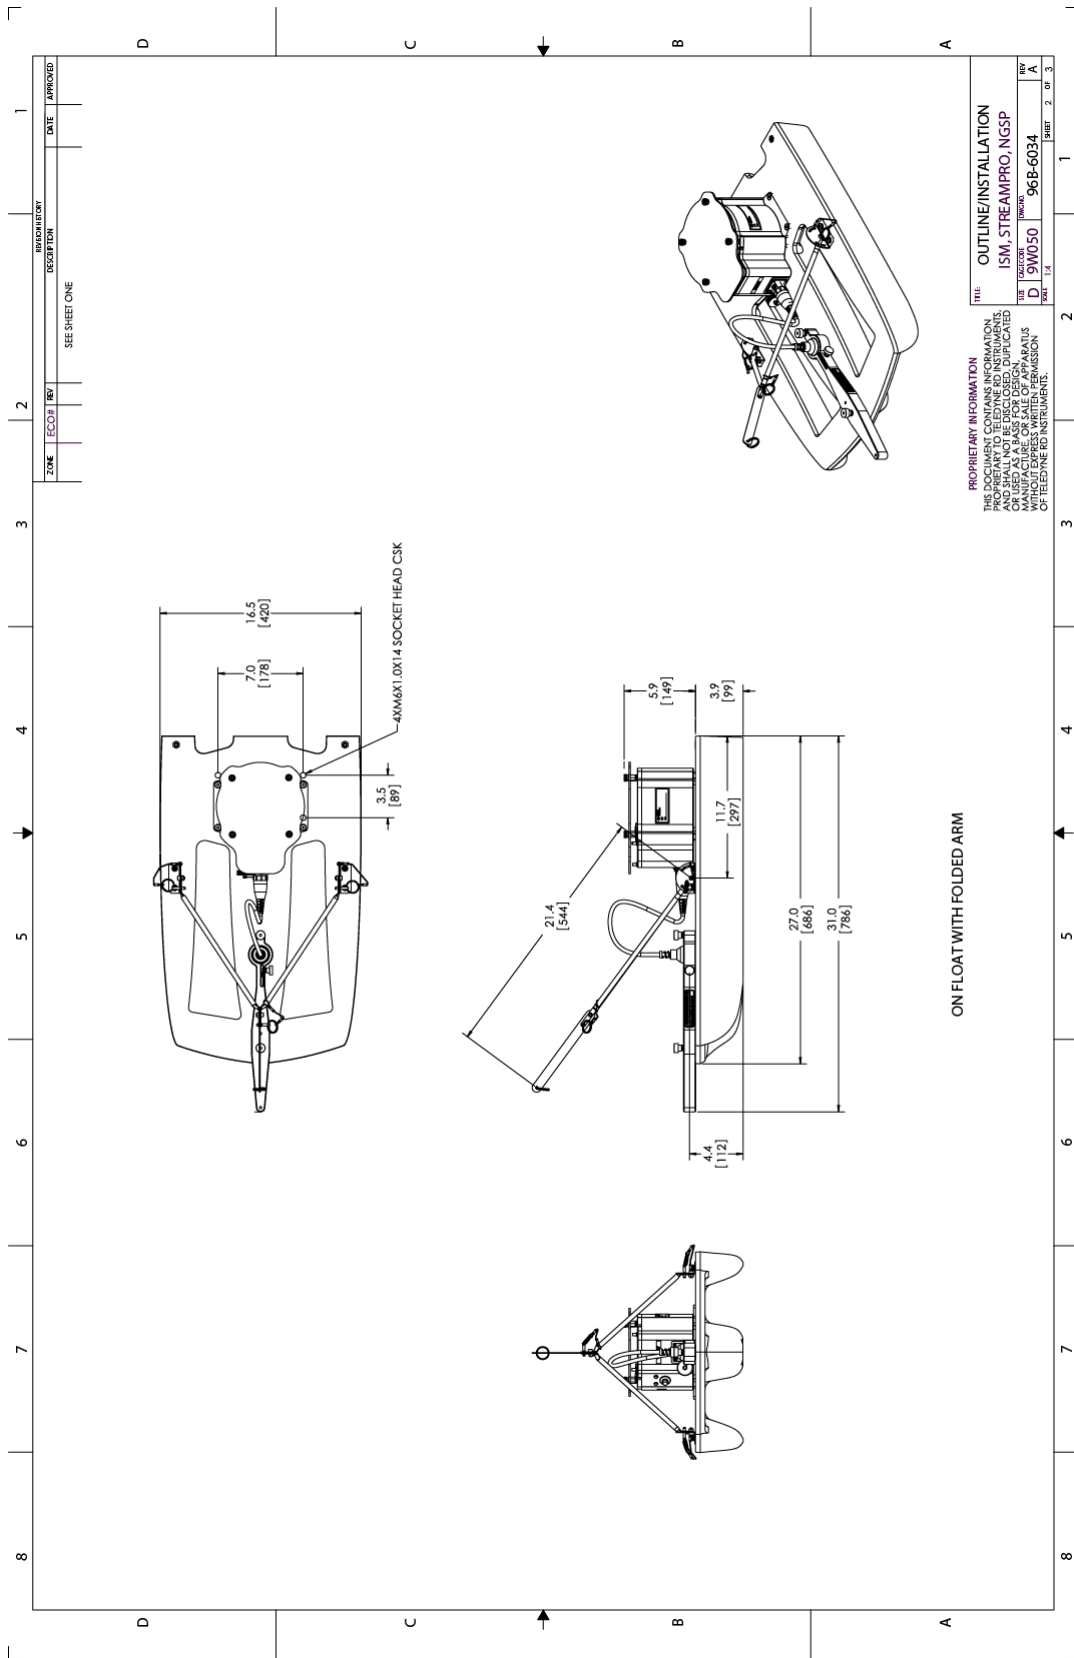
Outline Installation Drawing 96B-6034 – Sheet 2 of 3
